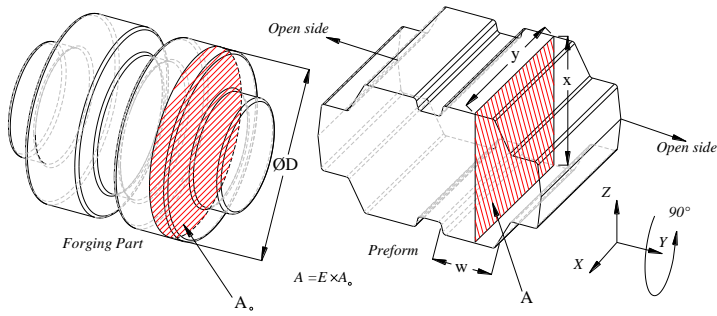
Each Quadrilateral Section In The Profile Must Fill The Circular Sections In The Mold Without Formation Of Any Flash. In Order To Reduce The Pressure Inside The Mold, Both Ends Of The Mold Are Assumed To Be Open.
